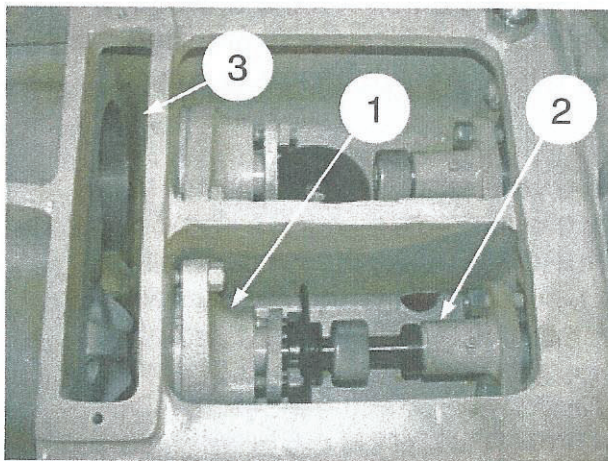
Oil stop head [1], lubricator packing gland [2] and inspection cavity [3].
